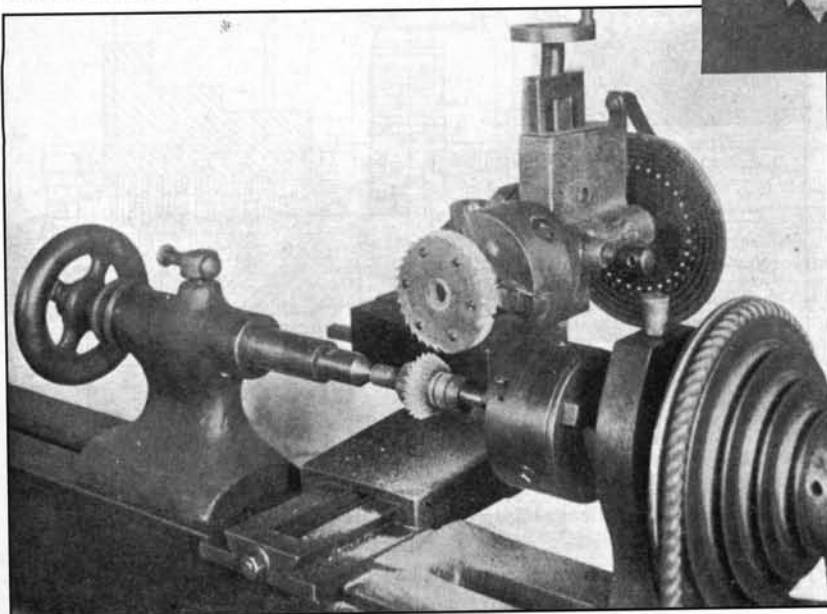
Showing the setting up and operation of cutting a thin ratchet wheel on a foot lathe.
